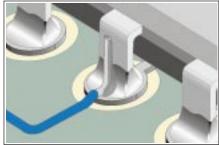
Acceptable* Wire soldered parallel to lead on component side.
